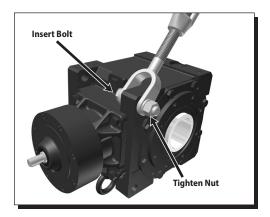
Turnbuckle Rod Type Torque Arm Parts
